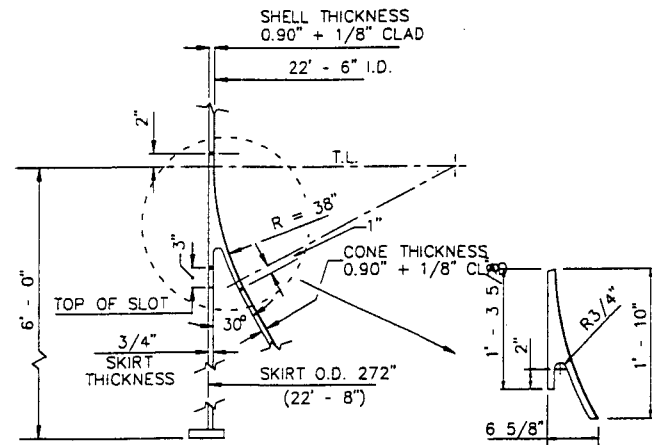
Special Integral Arrangement for Coke Drum Skirt Attachment
